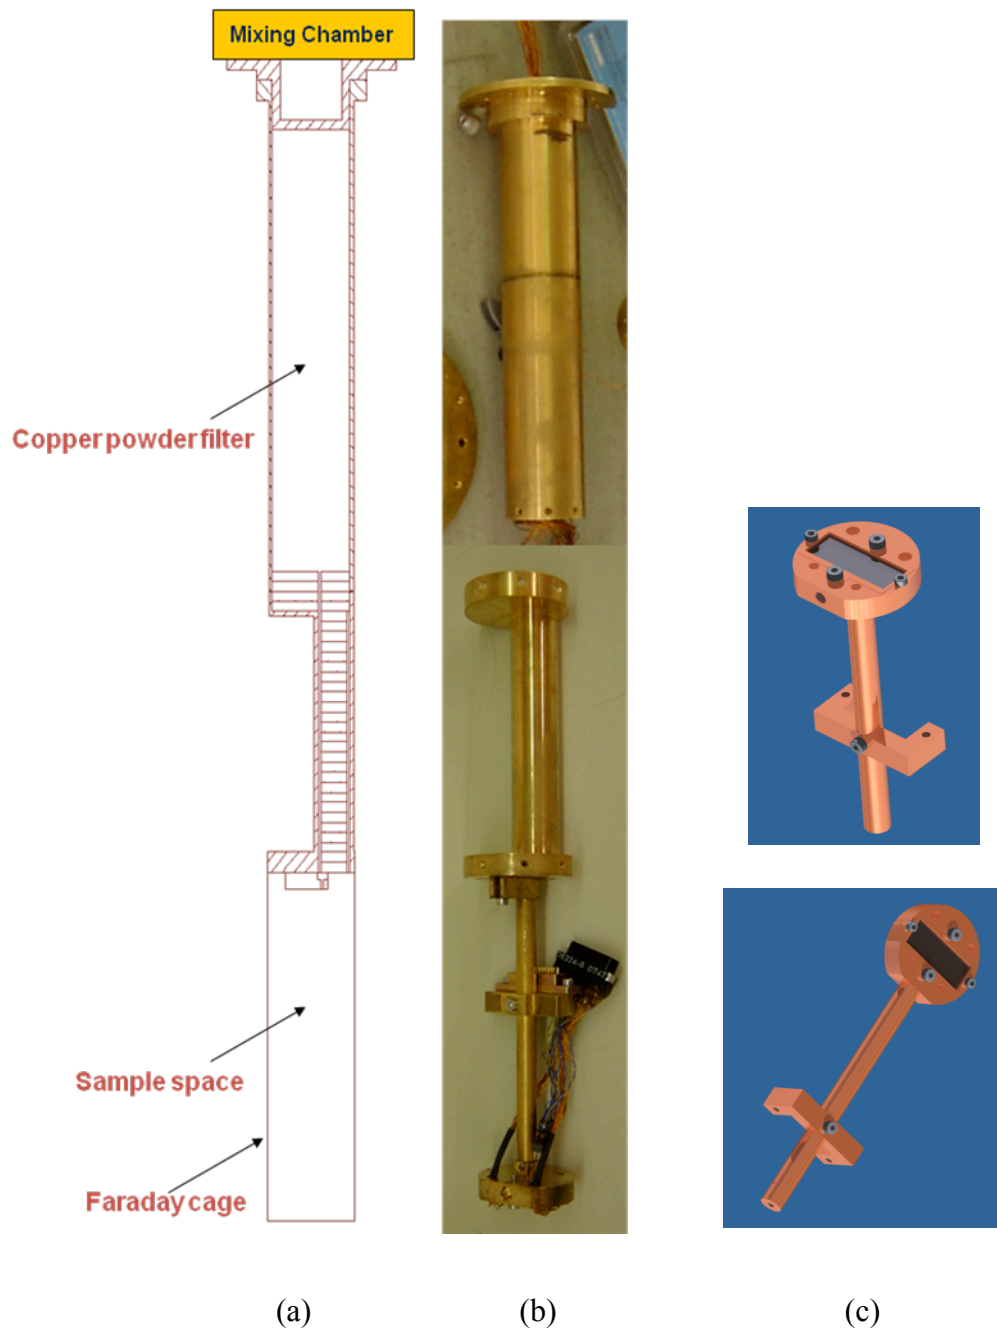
The tailpiece. (a) 2D CAD drawing with labels for each stage. (b) Photographs of the copper powder filter housing (top), and the sample holder with the sapphire chip carrier (bottom). (c) 3D CAD drawing of the sample holder with the chip carrier, showing two possible assembly schemes.
